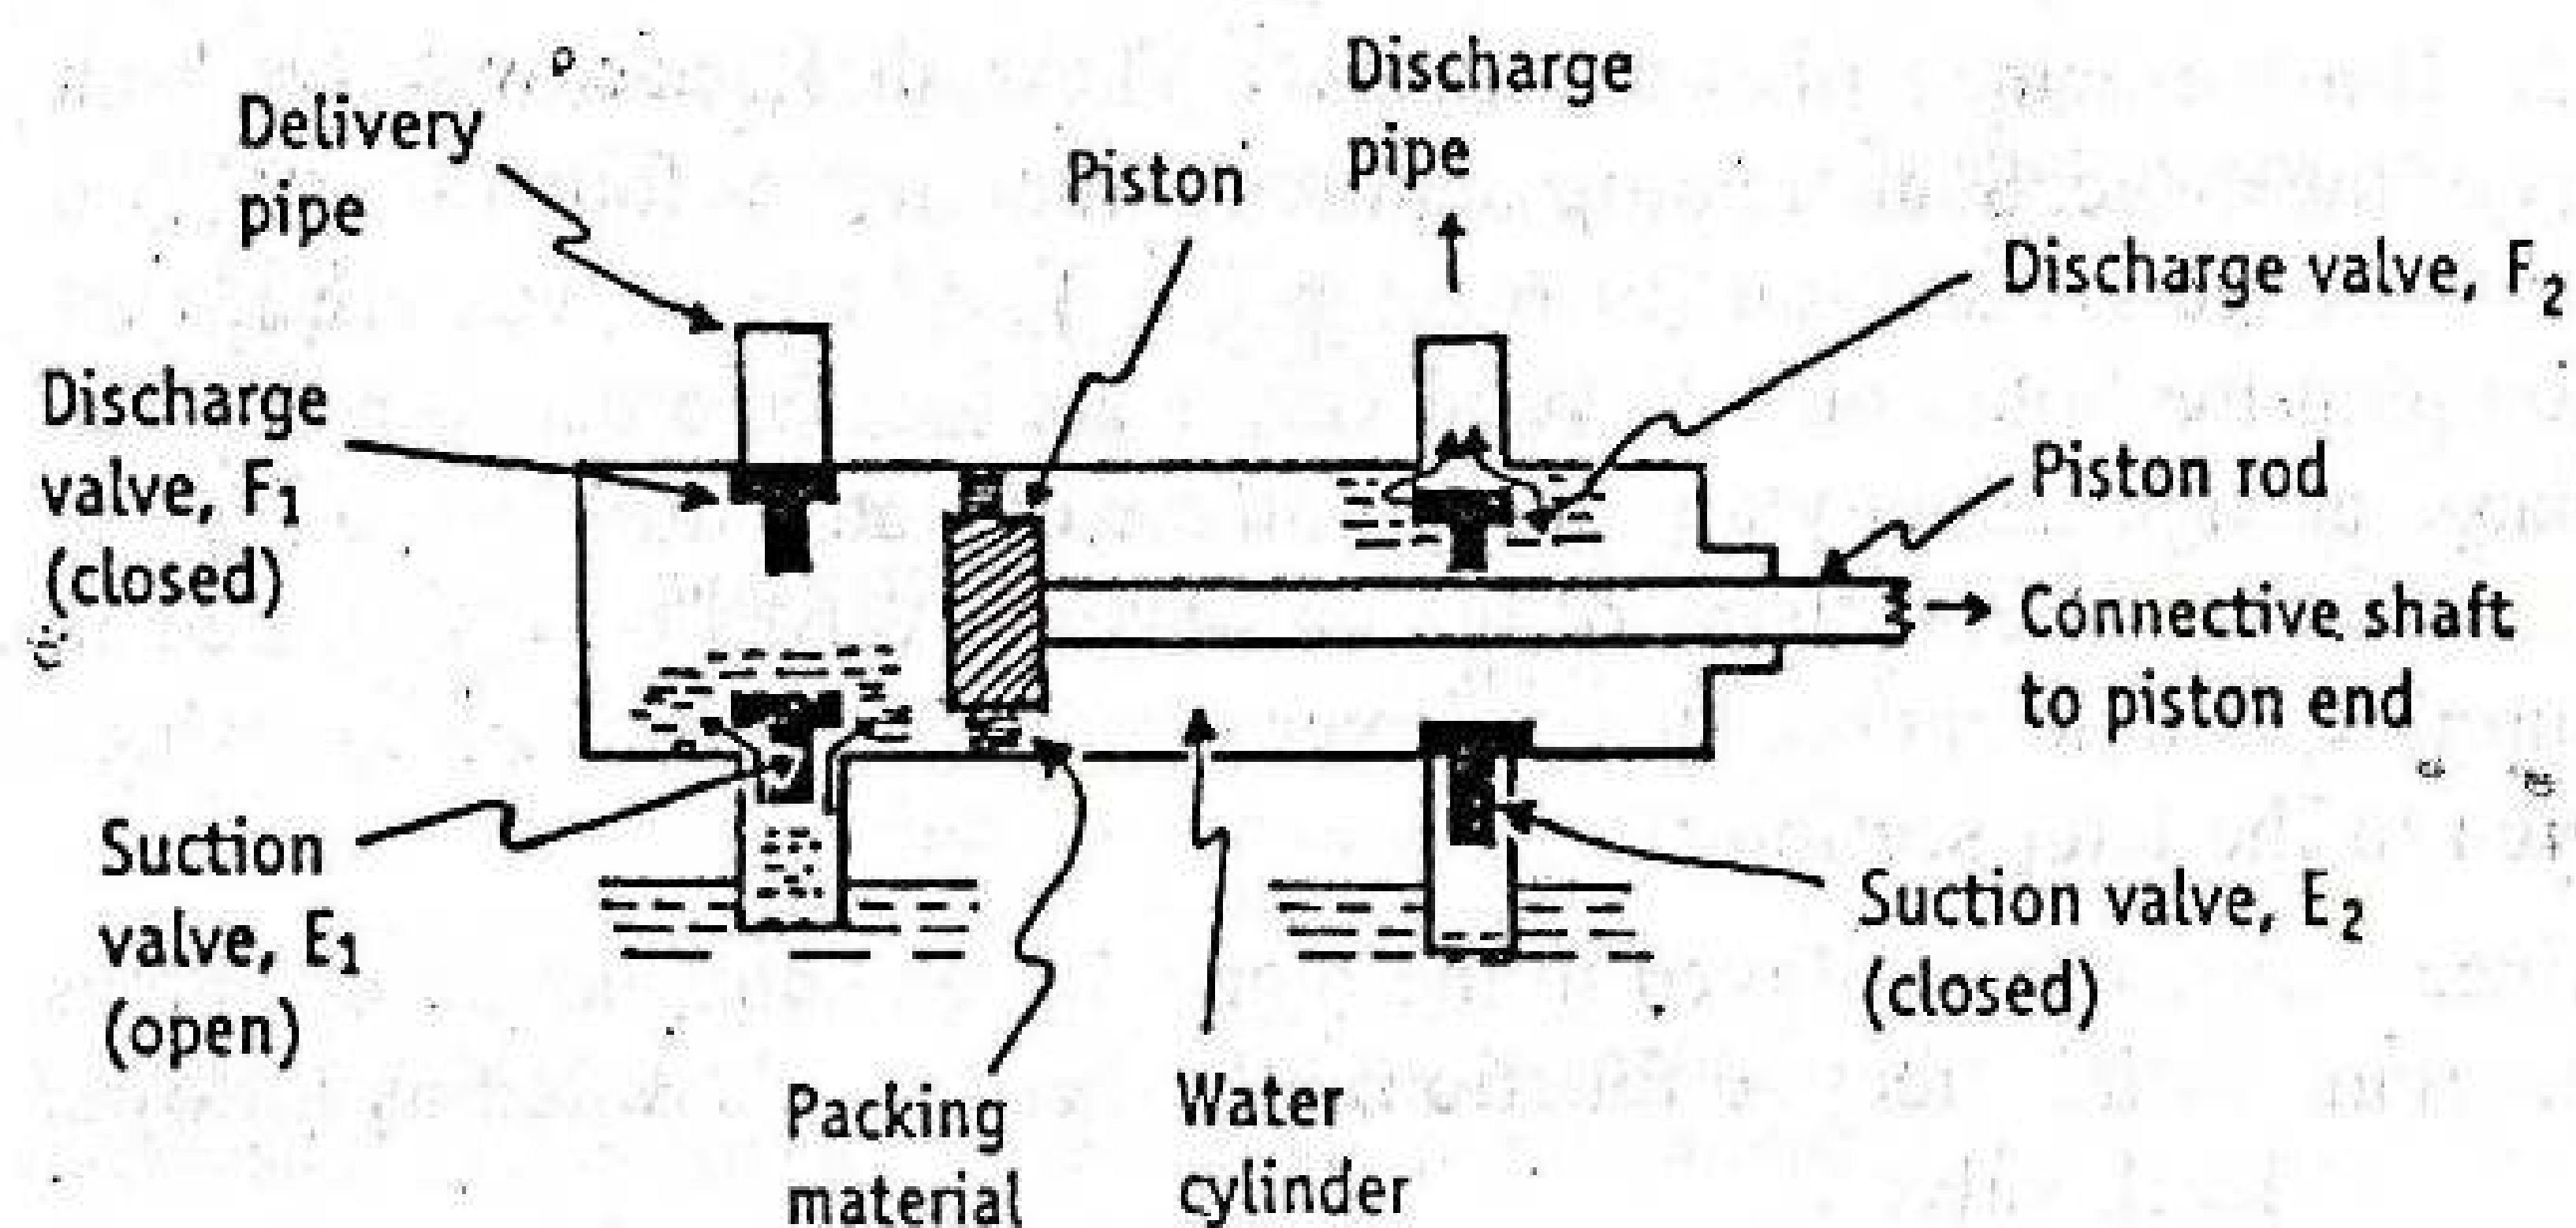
Construction of simplex, double-acting, steam-driven, deck-valve piston pump. Working principle is illustrated.
